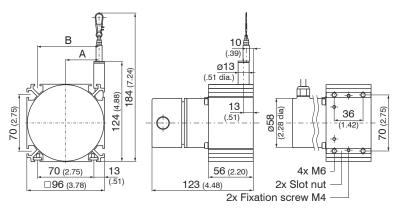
Dimensional drawing ... - FD96 - HTL/TTL, dimensions in mm (inches), not to scale
